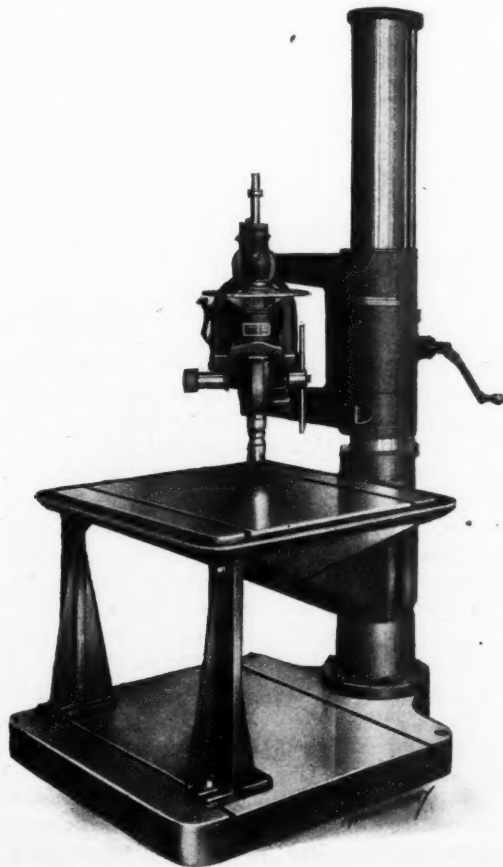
Rickert-Shafer Radial Tapping Machine with Double Arm folded
